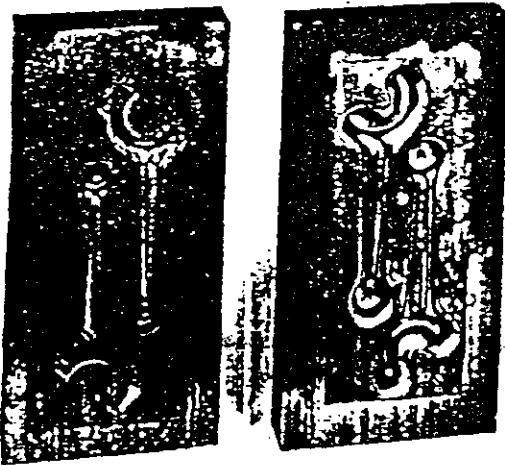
Steel forging die produced by two ECM operations. A 200 machine will produce a part of this size and complexity in 4 hr. (Courtesy of Anocut Engineering Company.)
